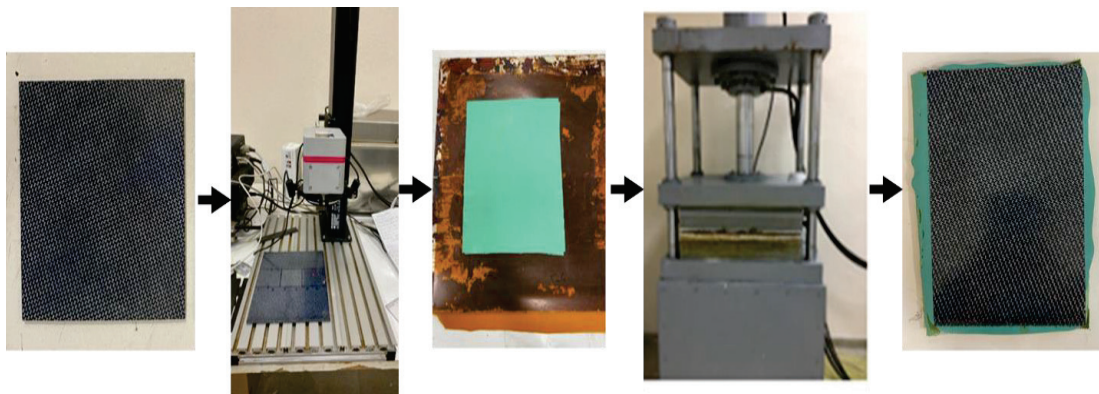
Manufacturing steps of adhesive bonding CF/PEEK plates.
